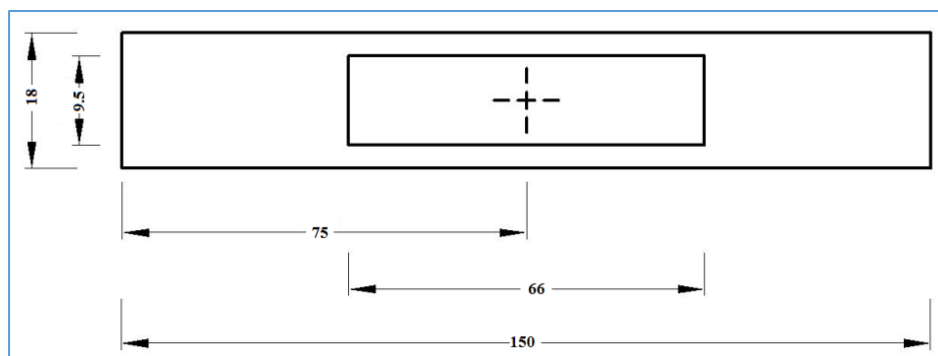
Connector hole centers and dimensions of test specimens (mm).
